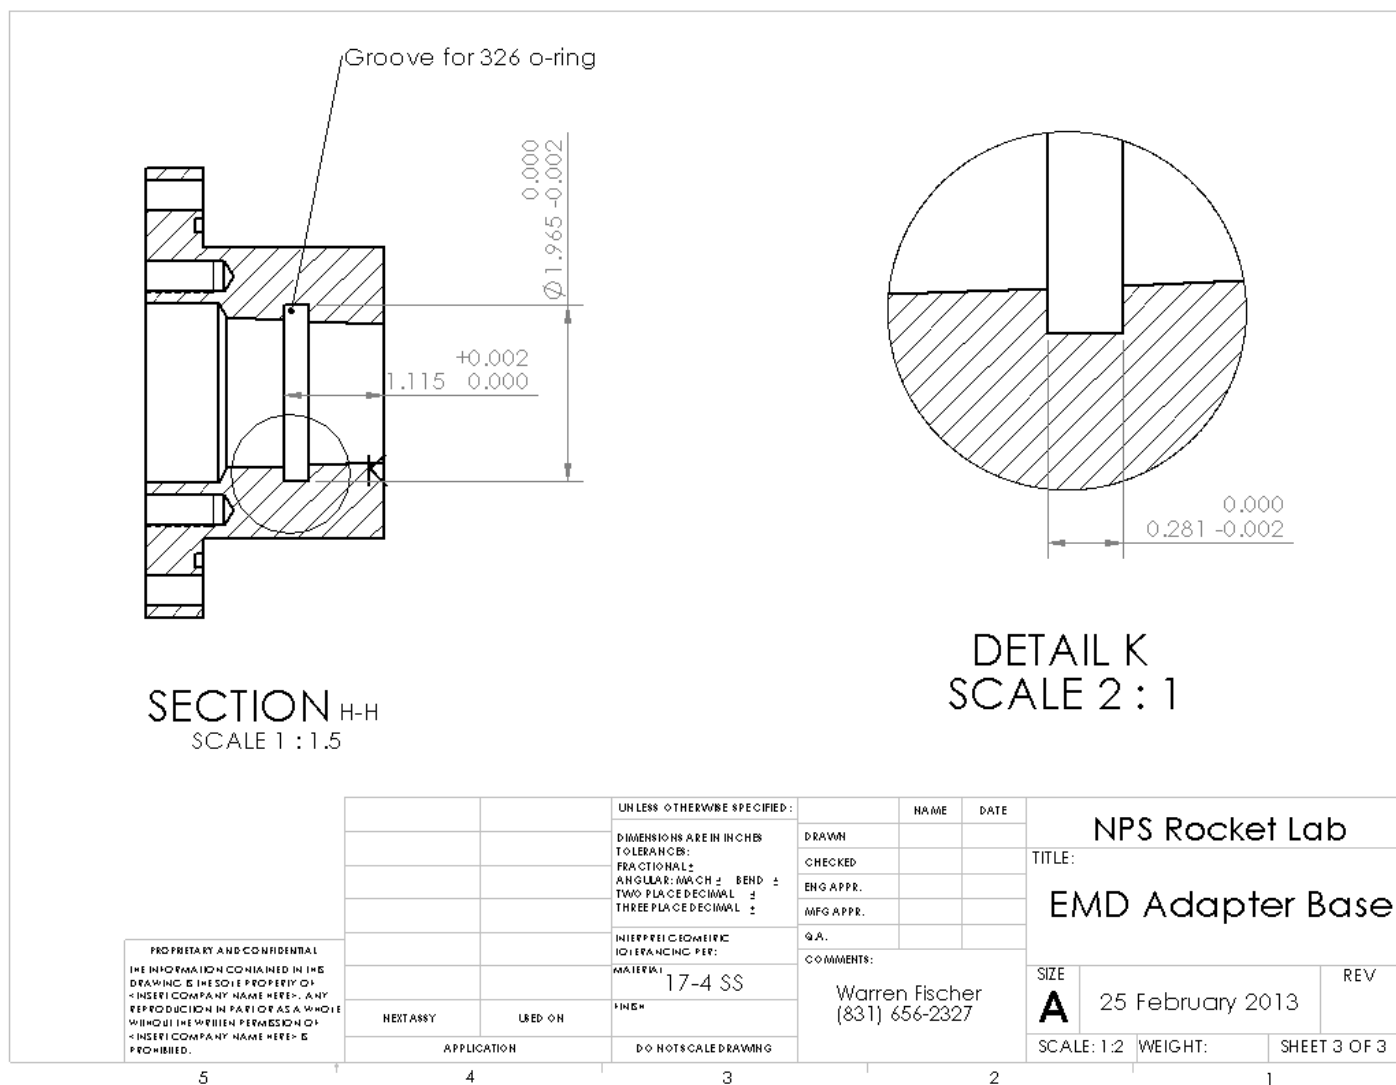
EMD Injector Adapter Fabrication Drawing (Page 3 of 3)
